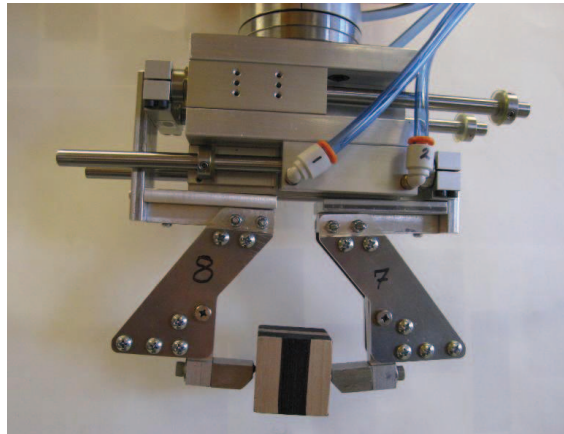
Schunk SKE Pneumatic Swivel Head
